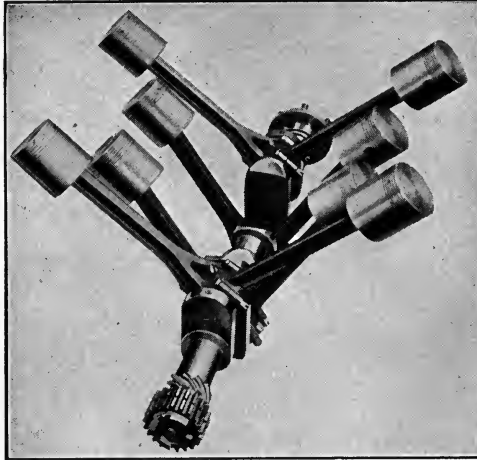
Cadillac crankshaft, piston, and connecting rod assembly.
